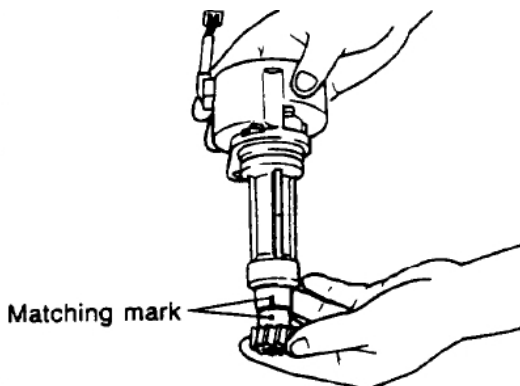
Crank Angle Sensor Alignment with Drive Gear
